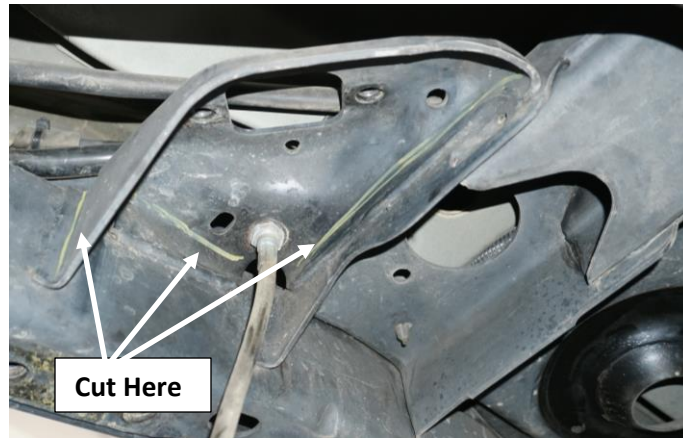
Rear Frame Shock Mount. Note that is not standard brake line routing and needs to be moved before cutting.
